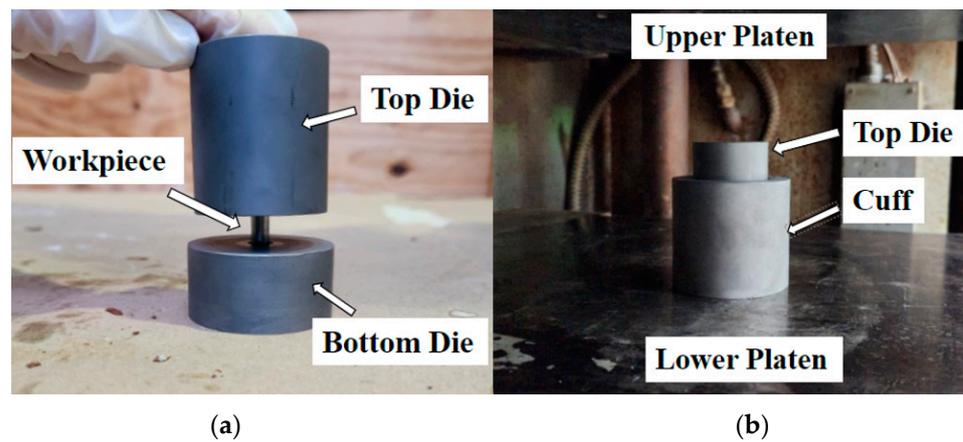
Threshing tooth bolt head forging apparatus (a) dies with workpiece and (b) dies with cuff.
